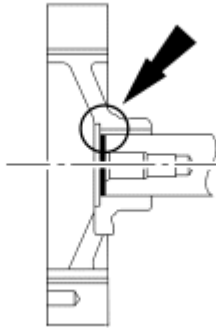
Installing Crankshaft Seal Using Special Tools (303-335 And 303-102)
